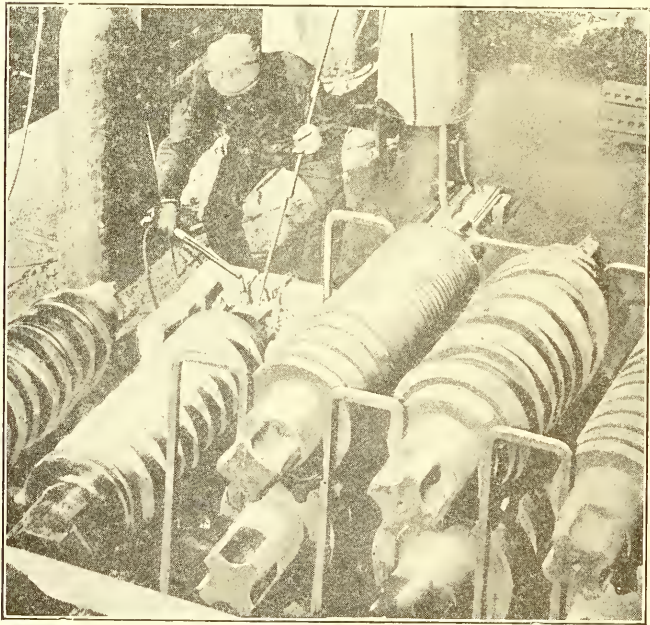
Welding Pods on Steel-Mill Rolls.
